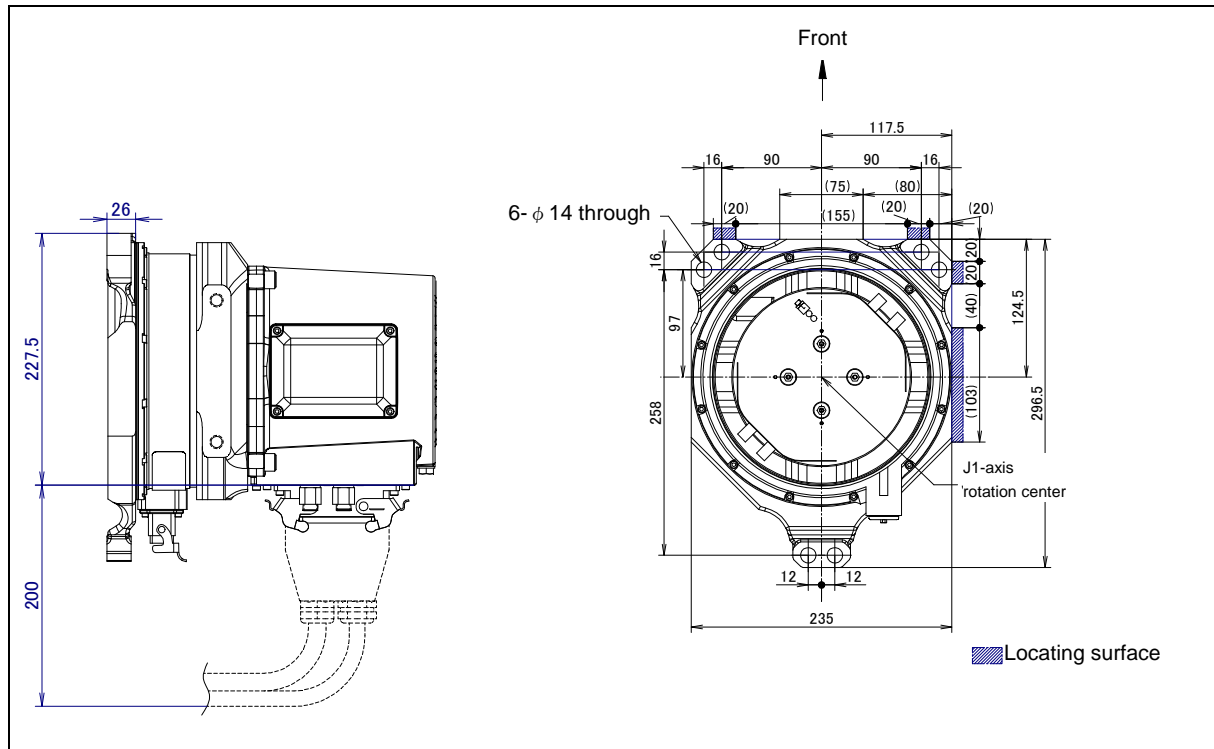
(a) Dimensions of the robot base (back side connector plate)
